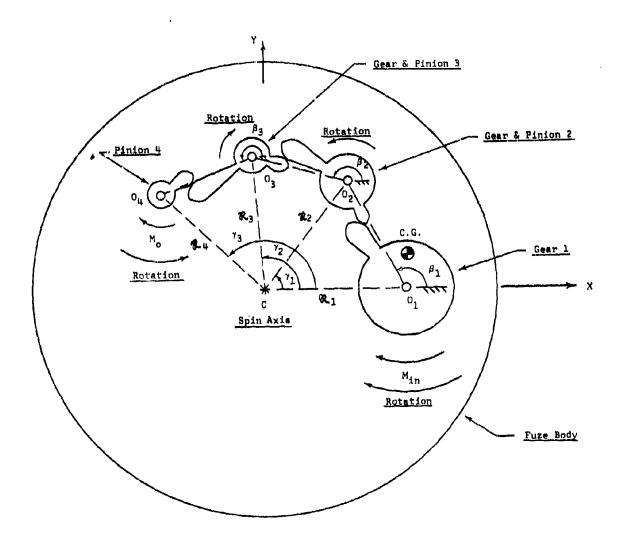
Basic configuration of three pass step-up gear train (shown with clock gear teeth)
